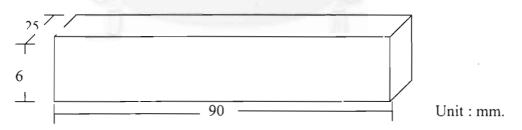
Dimension of flexure stress and MOE testing specimen.
